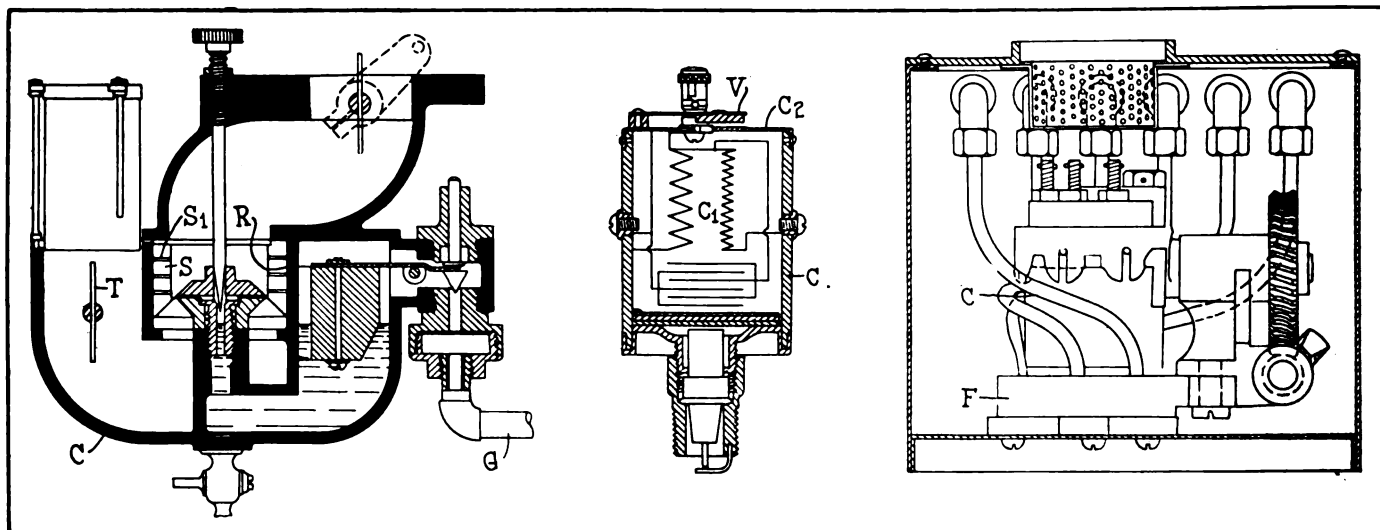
Raymond automobile carbureter. Fig. 2—Wilcox-Lawton spark-plug. Fig. 3—Swanson force-feed lubricator
